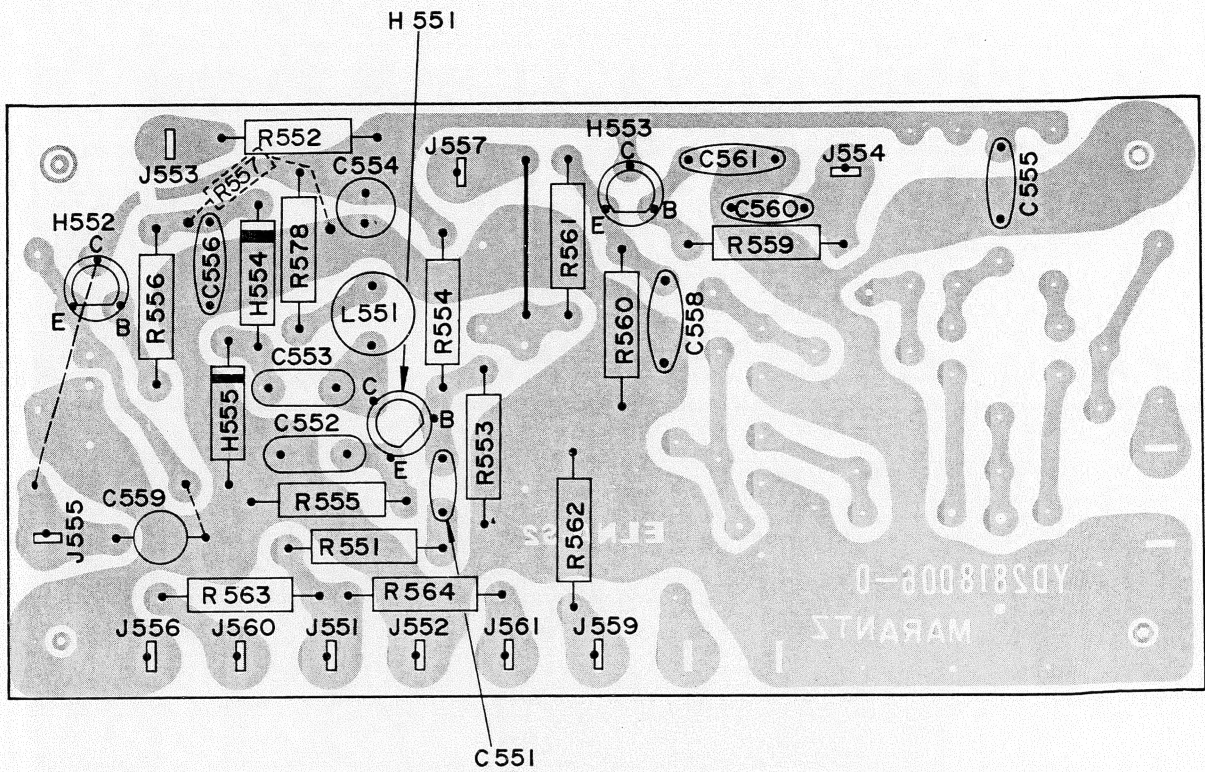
Muting Control Amplifier Assembly P550 Component Locations
